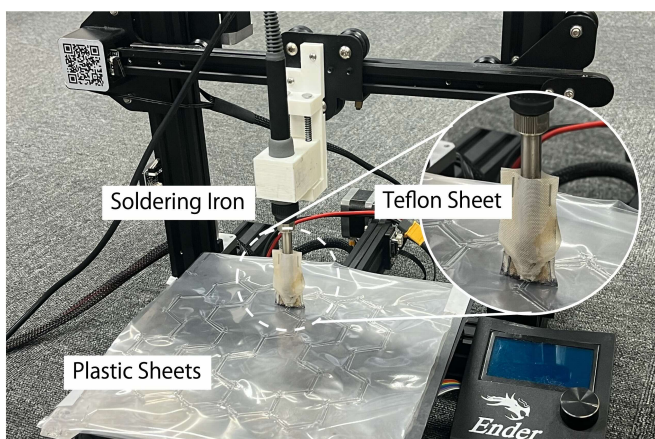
Configuration of the automated fabrication system. A soldering iron is attached to the head of a modified 3D printer to precisely execute heat-sealing patterns through XYZ table control.
